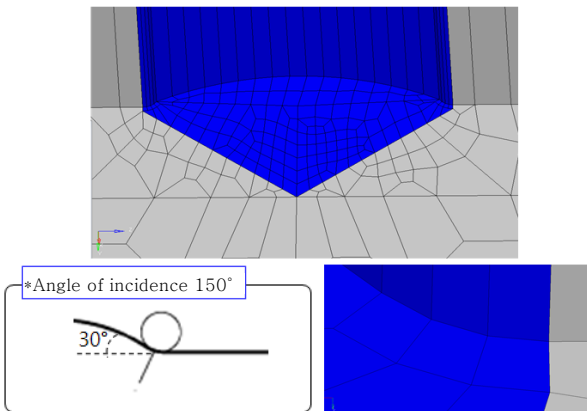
The section of 1-sided submerged arc welding and its bead tow having radius (1mm)
